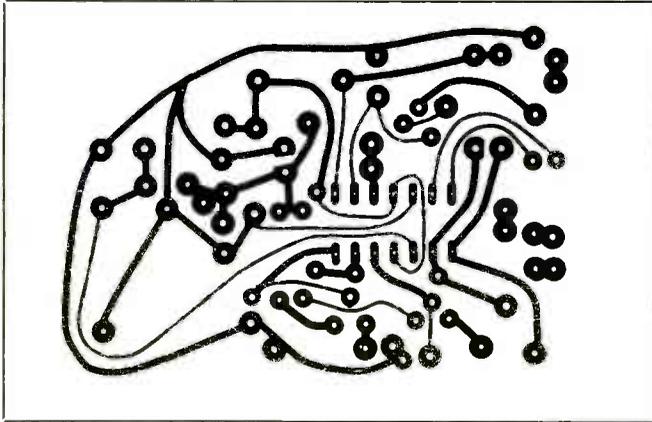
Actual-size etching-and-drilling guide for fabricating printed-circuit board.
